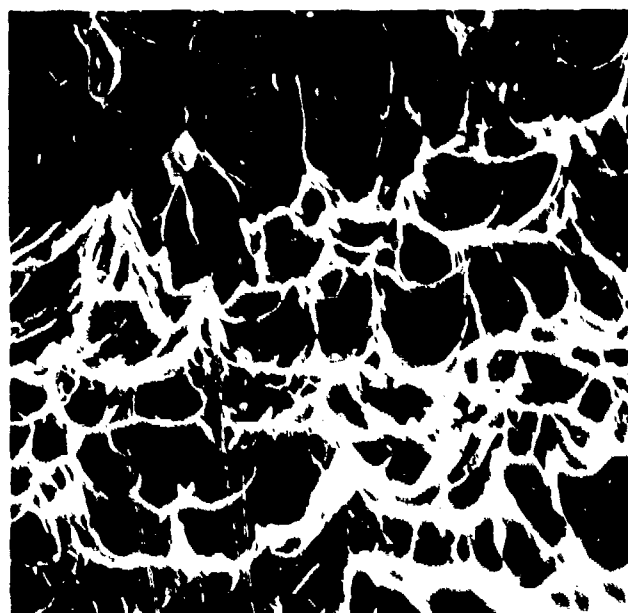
Fracture surface of an A-514 weld Charpy specimen tested at or above -18°C , 4250x.
